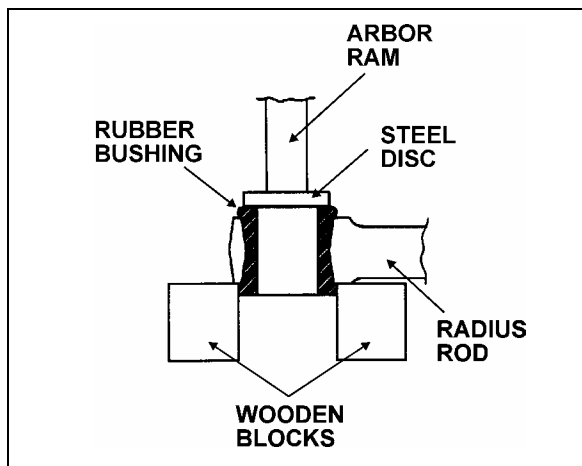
RADIUS ROD BUSHING REMOVAL 16011
